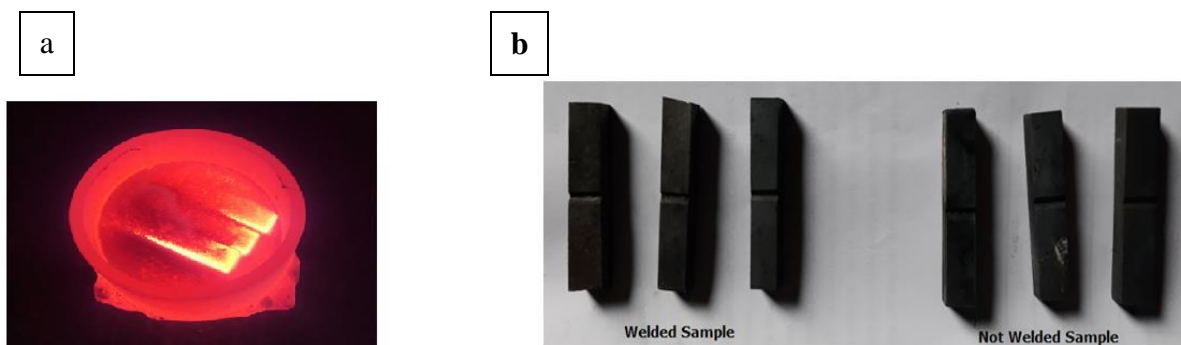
Schematic Operation of park carburization of weld and non-welded ASTM A516/516-05 for Impact Test
